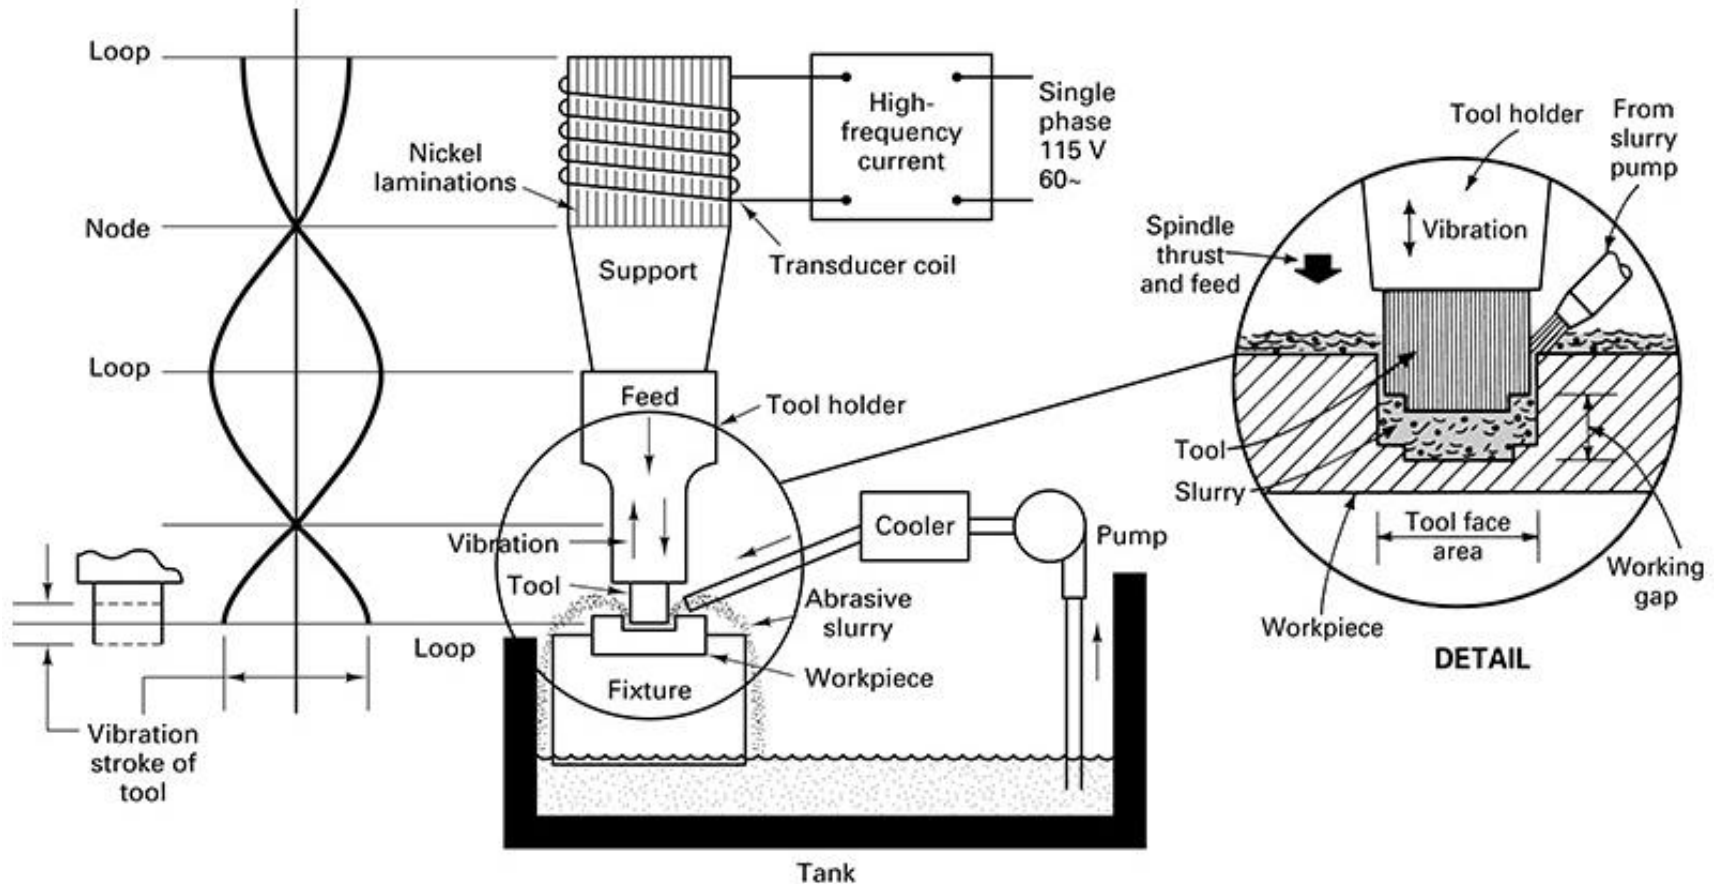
Sinking a hole in a workpiece with an ultrasonically vibrating tool driving an abrasive slurry.
